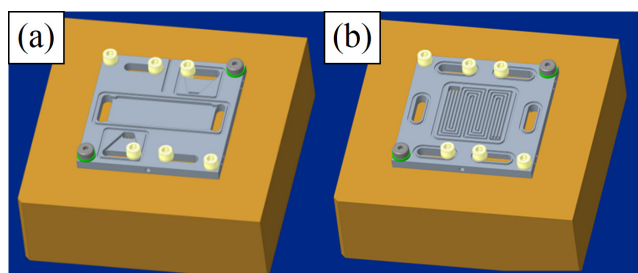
BPP clamping for CNC milling, matched shoulder bolts with clamping screws: (a) water cooling side, (b) serpentine side
